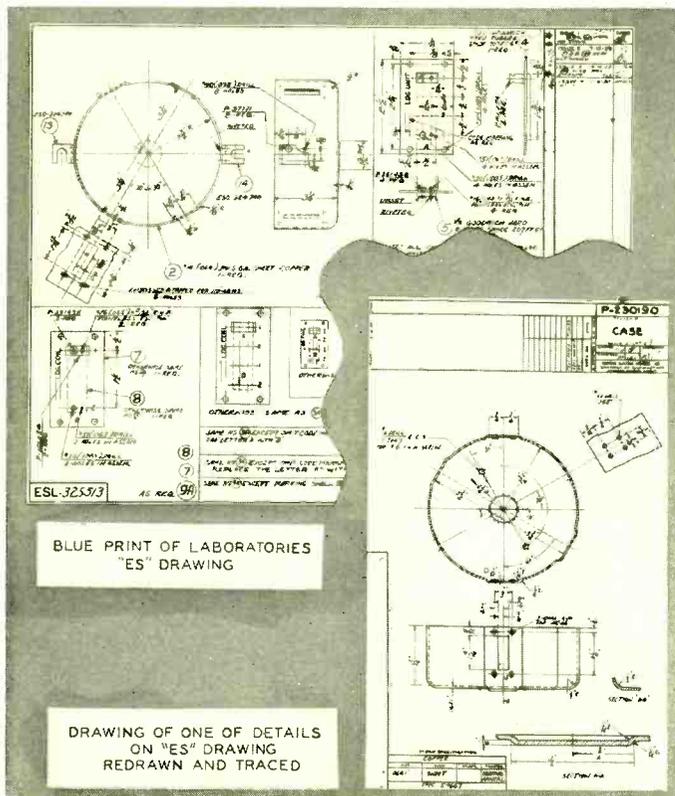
Under the old scheme of making up manufacturing drawings, the Western Electric Company was obliged to draw entirely new tracings from each Laboratories drawing in order to insert the manufacturing information determined at Hawthorne
